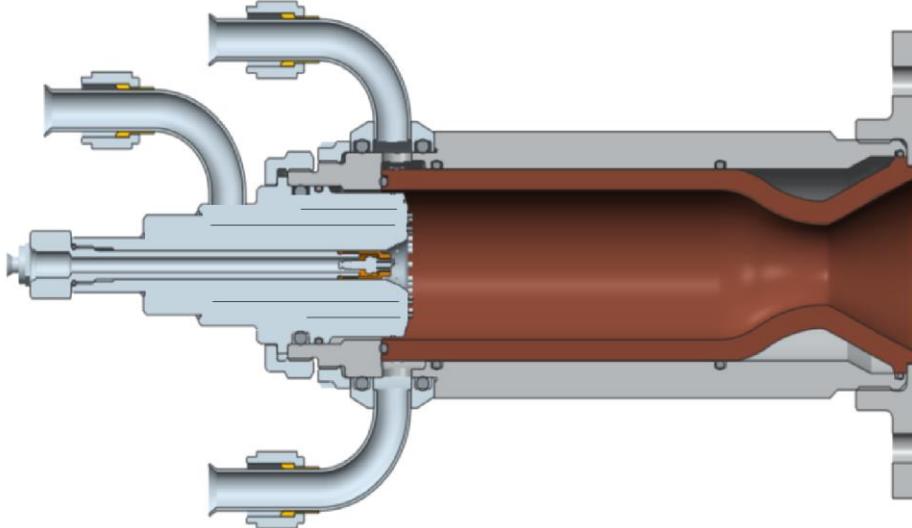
1.2K SLM Printed Regen Chamber with Slip Jacket and O-Ring Design.
